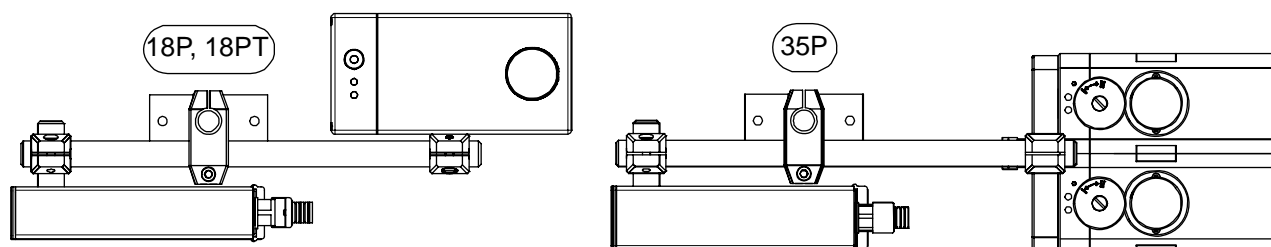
Left-handed printhead housing and parallel reservoir (standard)
